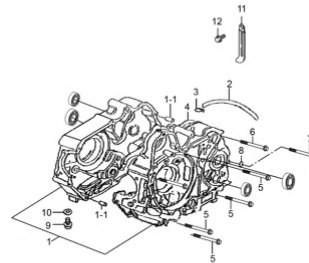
CRANKCASE COVER (X01-S040-0013)
